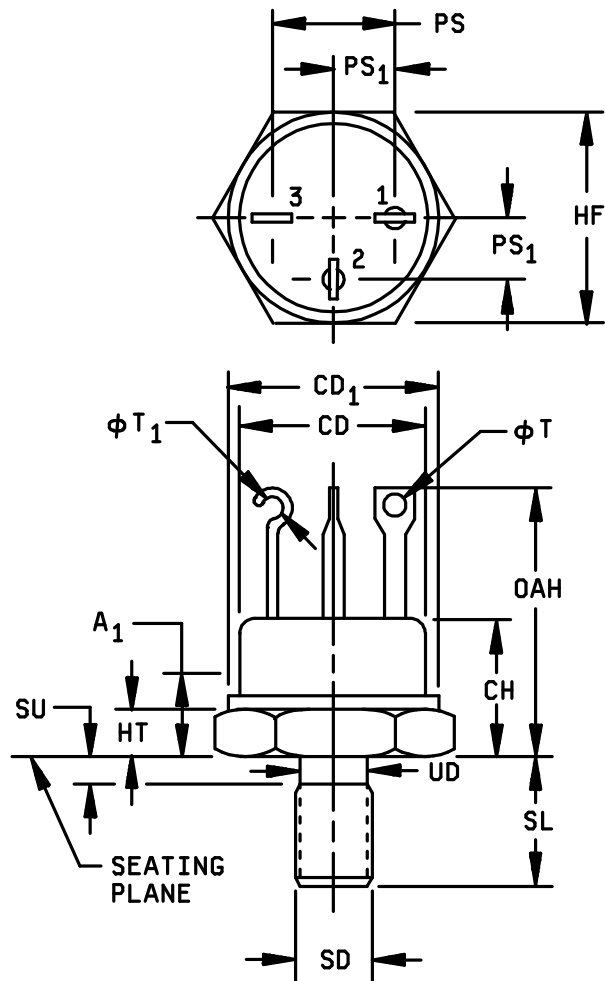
Physical dimensions of T-7 family. (Similar to TO-61)
